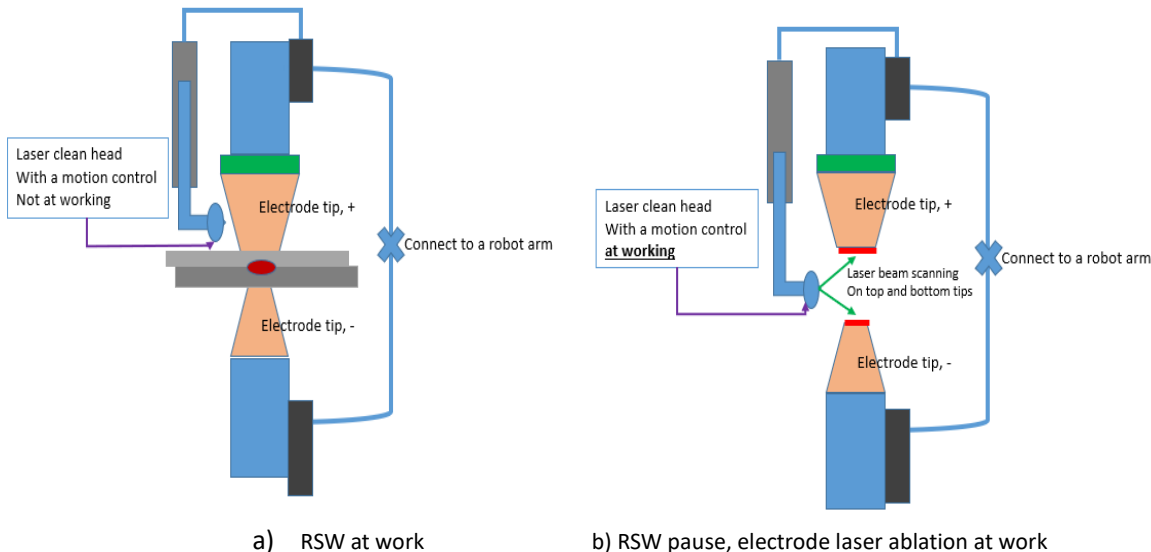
Sketch of laser ablation system integrated into resistance spot welding gun
